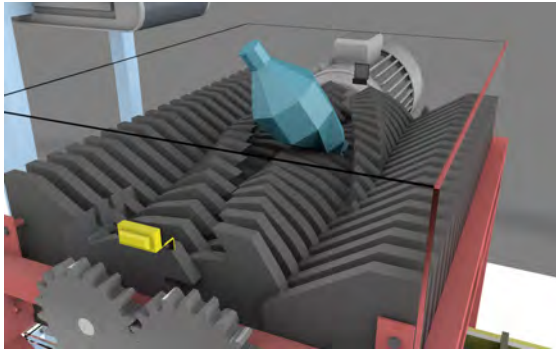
The blades of the shredder grabbing a PET bottle and shredding it into smaller pieces (granules).
